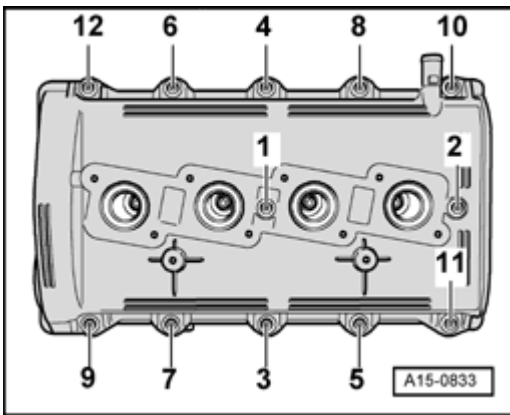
Cylinder Head Cove Bolt Loosening/Tightening Sequence
